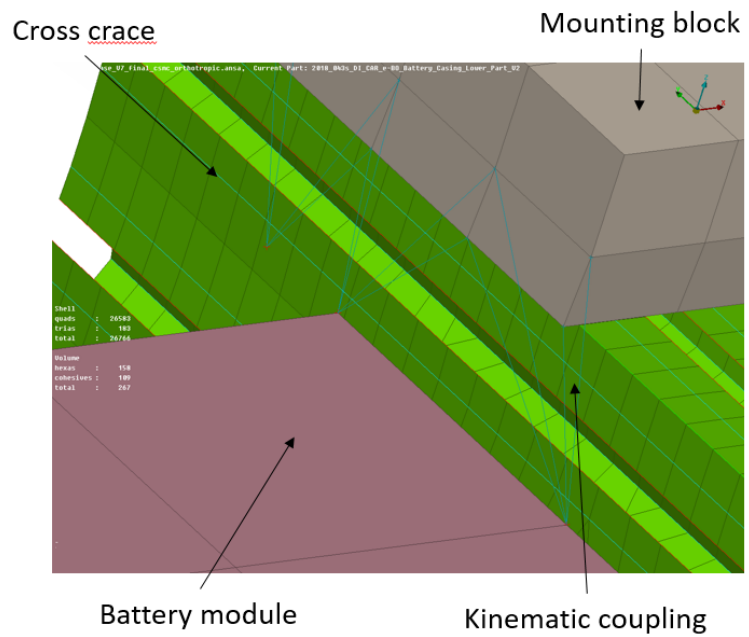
Detailed view distributing coupling between the mounting block and the battery module
